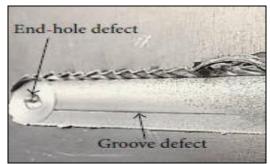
Top view image showing groove defect obtained by unstable temperature distribution and end hole defect obtained by end of weld and removing tool in FSW as presented by Hussein et al. [103].
